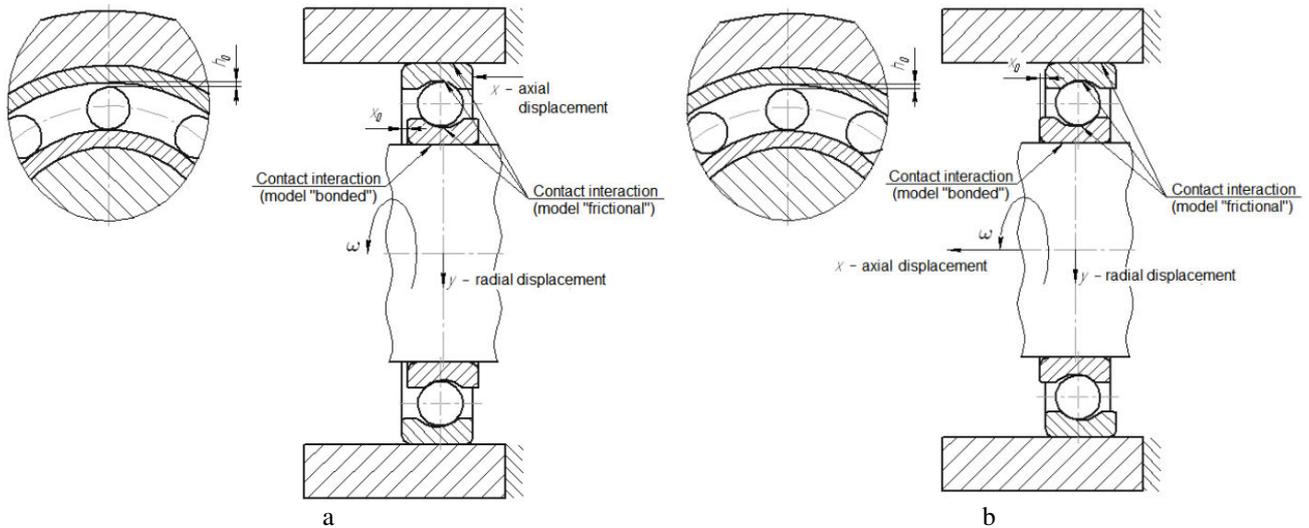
Design scheme of the bearing supports 45-216 (a) and 45-276214 (b)
